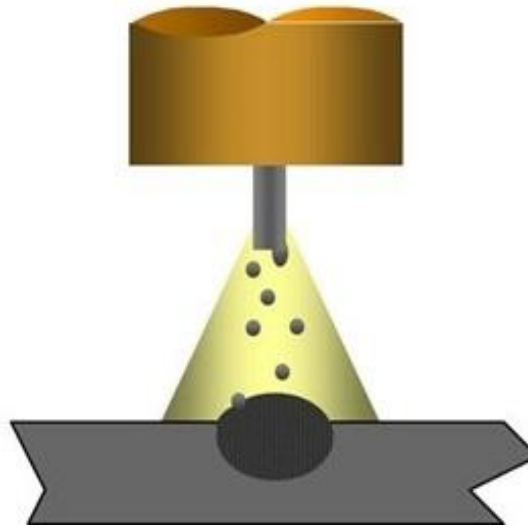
Metal-cored wire uses a spray transfer process that creates small droplets of filler metal that settle in the weld pool, producing little to no spatter (canadianmetalworking.com/canadianindustrialmachinery/article/welding/pairing-metal-cored-wires-with-robotic-welding, 2025).
